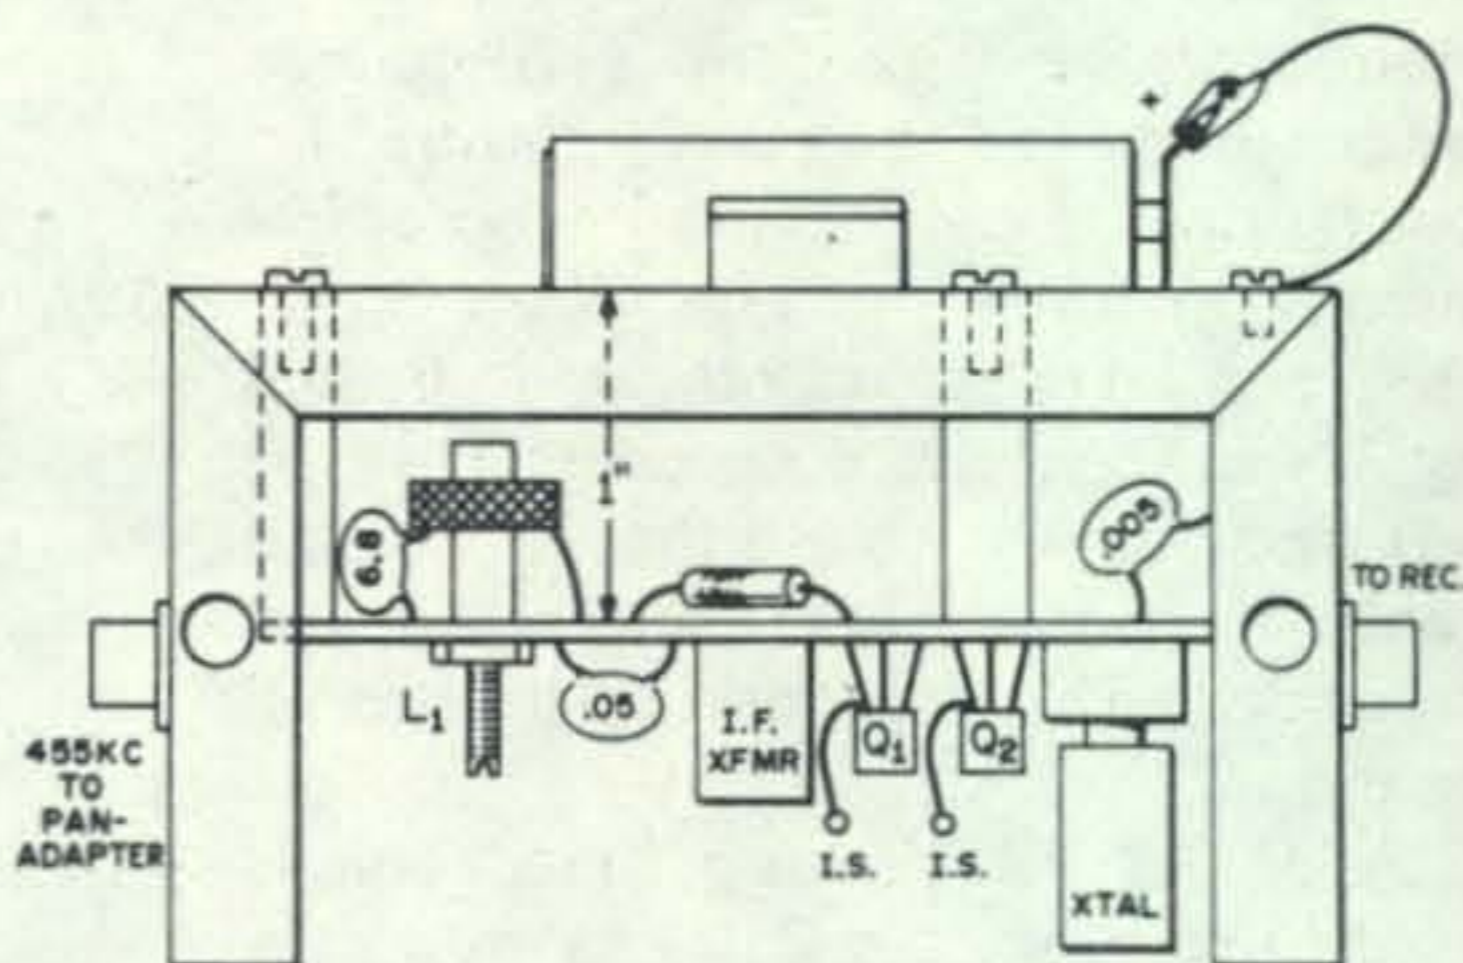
Sketch showing the layout of the major components of the converter for the Ham-Scan panoramic adaptor.
